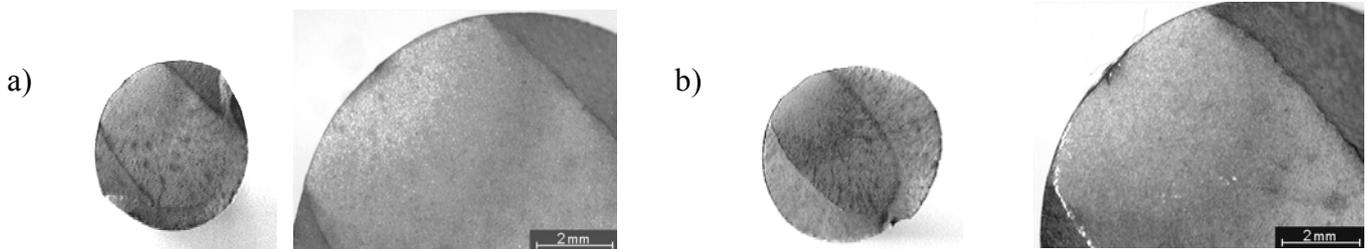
Macroscopic appearance of fracture surfaces. $R=0,5$. a) without torsion; b) with torsion.
